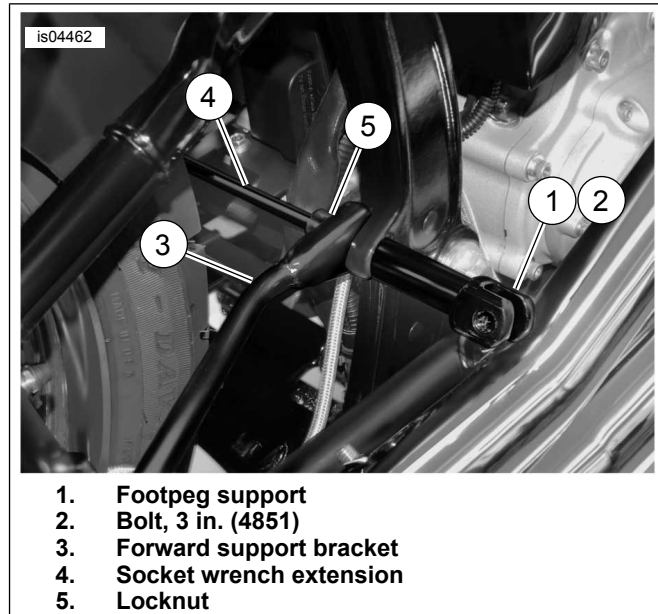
Install Forward Support Bracket and Footpeg Support (Right Side Shown)
